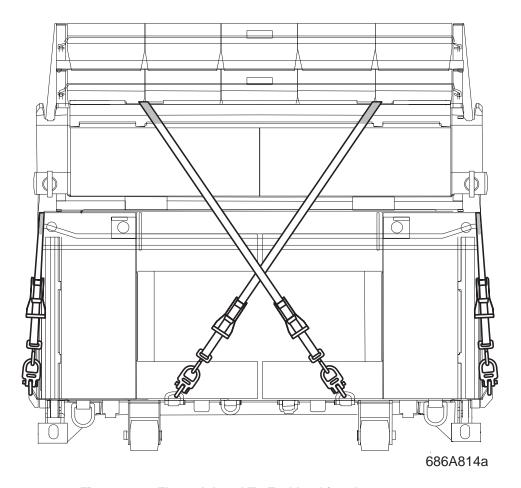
61 Flatrack Load T1 End Lashing Arrangements
